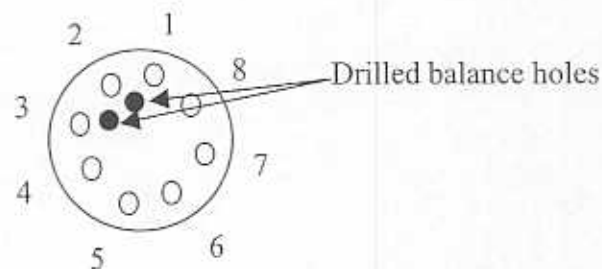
Right end view of test rotor showing numbered imbalance holes
